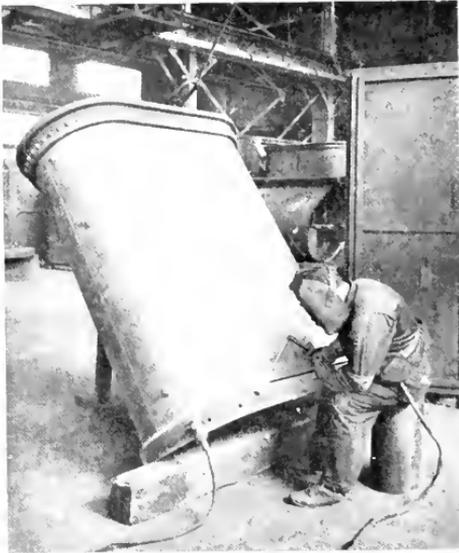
Position in Which Tank is Placed When Outside Base Seam is Welded. The base and shell joint also have a light reinforcing weld on the inside
